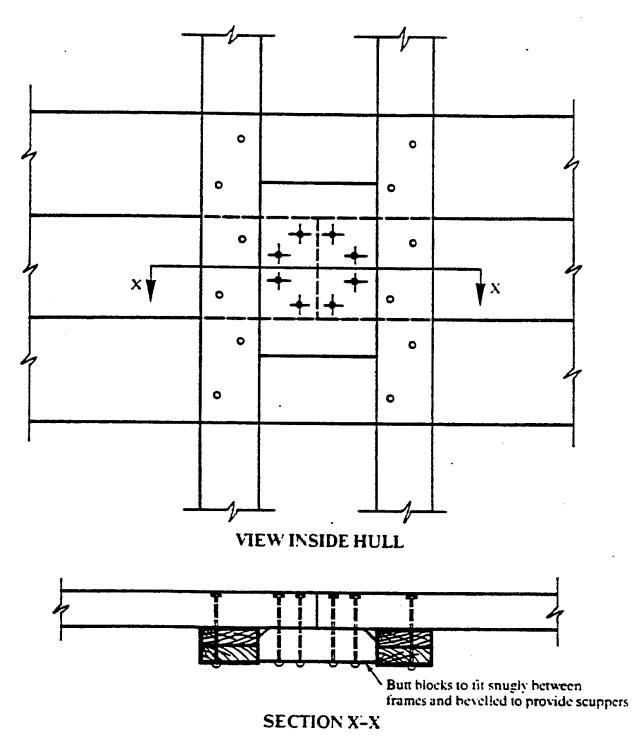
TYPICAL BUTT BLOCK IN HULL PLANK
